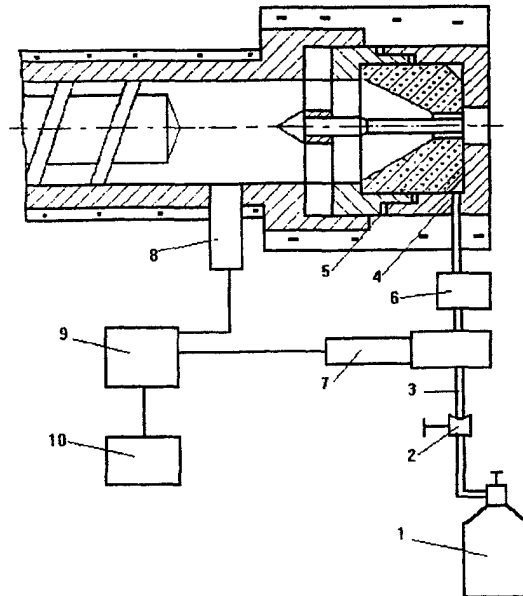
Extrusion die with automatic pumping of a lubricant. Layout of regulating system: 1 - high pressure cylinder; 2 - air pressure regulator; 3 - joining tubes; 4 - lubricating chamber; 5 - porous element; 6 - room for the liquid lubricant; 7 - transducer for lubricant pressure; 8 - transducer for polymer material pressure; 9 - electronic governing unit; 10 - recording unit.
